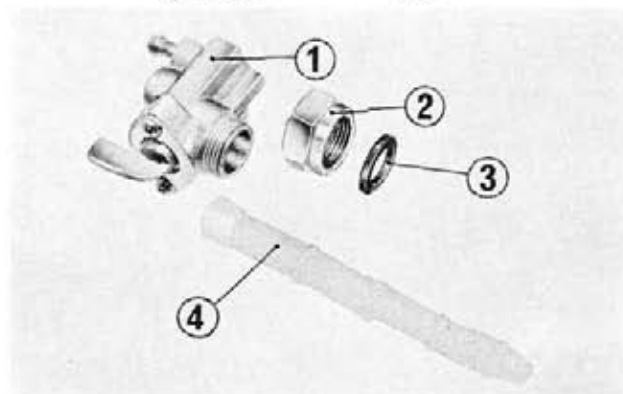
① Fuel cock ② Fixing nut ③ Gasket ④ Fuel filter
